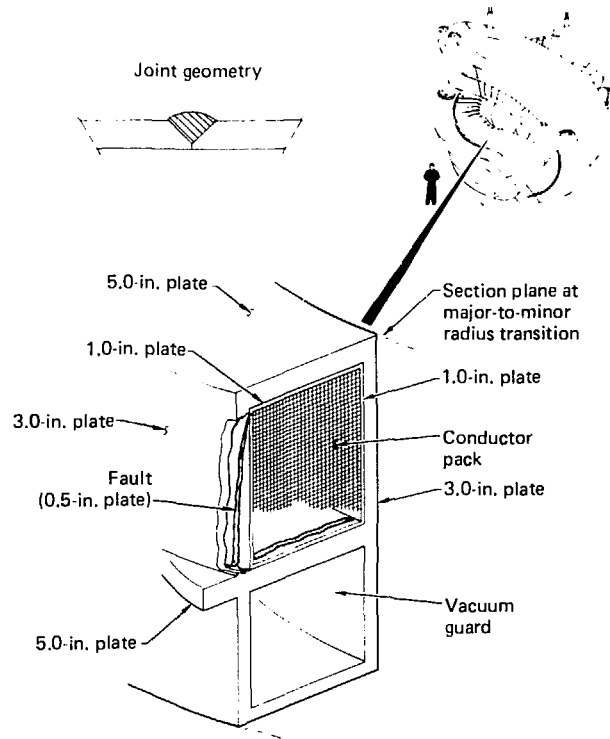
Fault No. 2: conductor pack jacket close-out weld in the major-to-minor radius transition.
